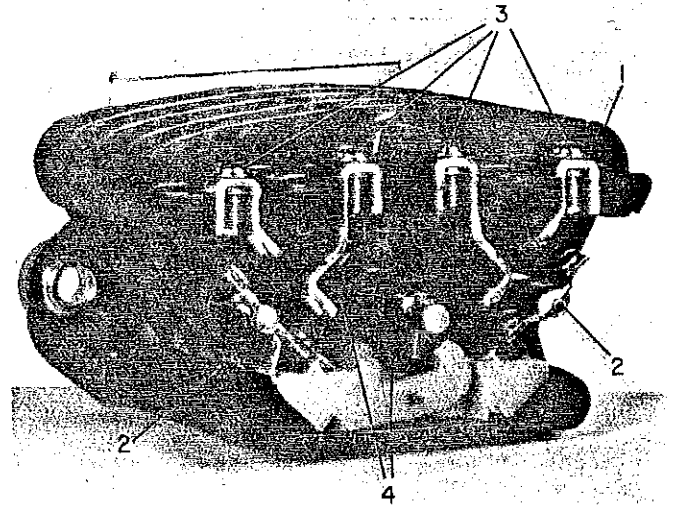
Partially Dis-assembled SB-12 Auxiliary Switch
